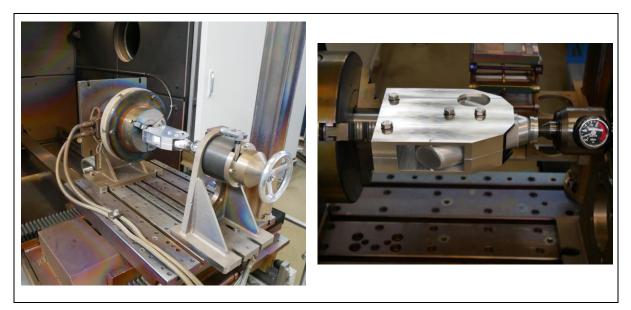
Hydrogen vessel on the EB welding machine
